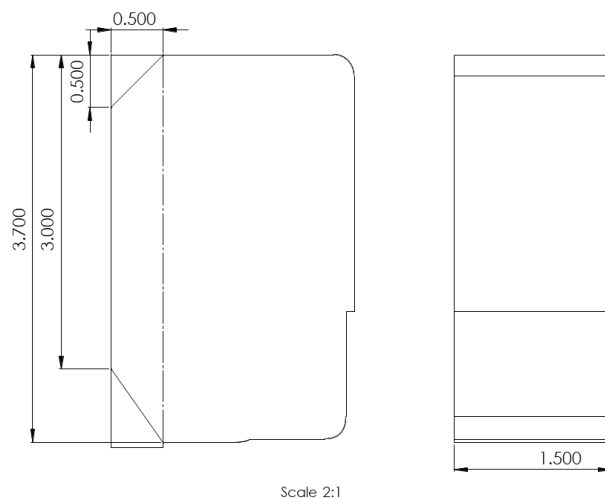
2D Drawing of end cap joints. Dimensions in inches.
